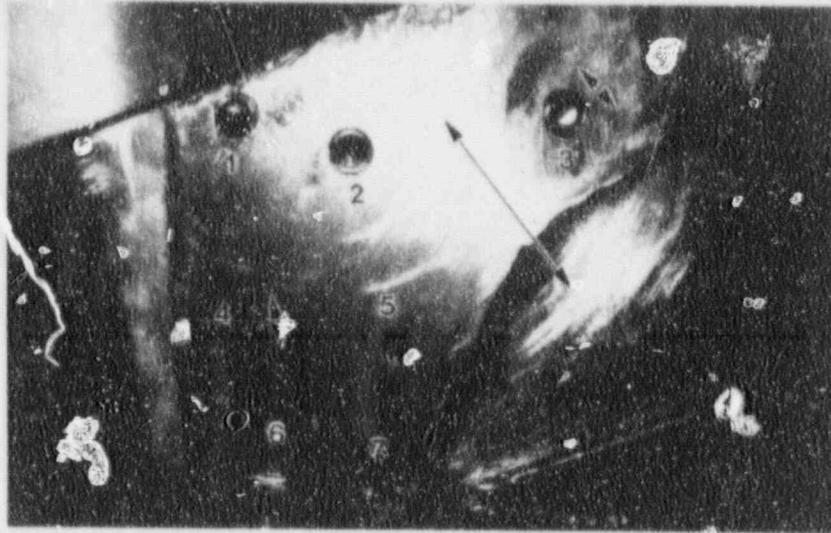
Side view of the left rear end sheet at the location of the stubshaft support bracket. Note, bolt holes numbered 1-5 and 7 are the location of the primary bolts that attach the bracket, while bolt hole number 6, and a bolt hole directly below bolt hole number 6, attach the lubrication oil manifold to the bracket. The small arrows show the direction of reverse bending of the bolts while the long arrow shows the direction of reverse loading of the entire bracket.
